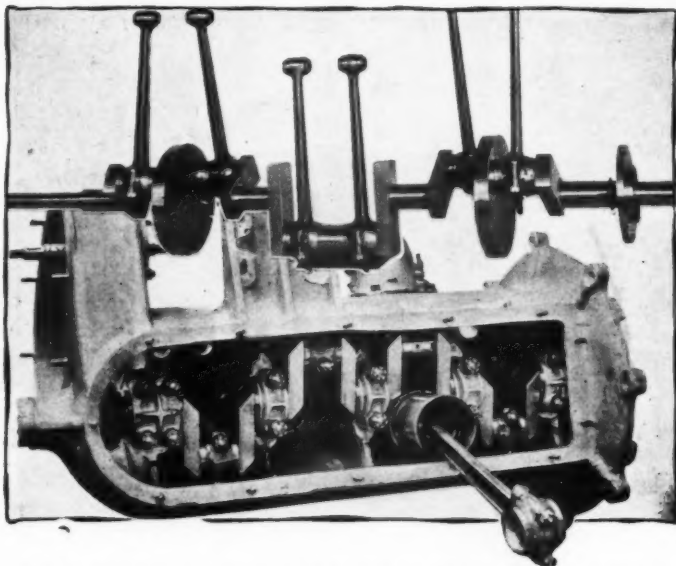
Six-cylinder crankshaft in use on the Talbot cars and the 15-horsepower Crossley crankcase
